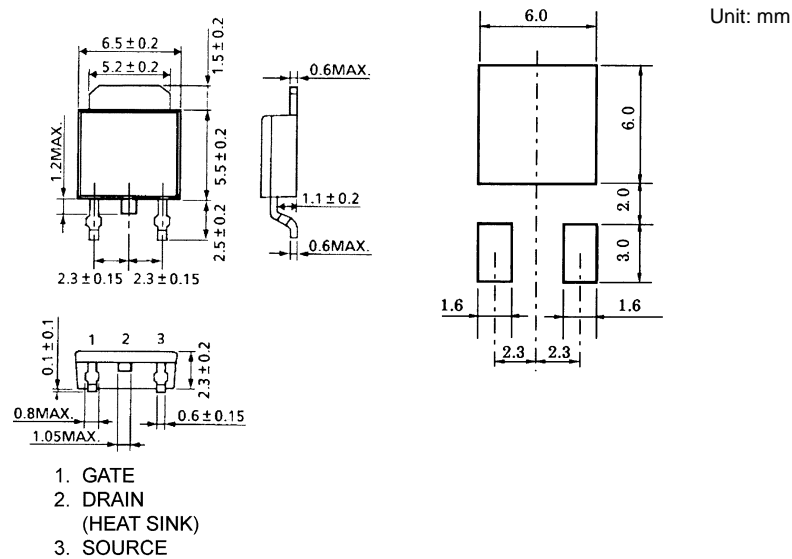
Minimum Pad Dimensions for PW-MOLD and DP Packages
